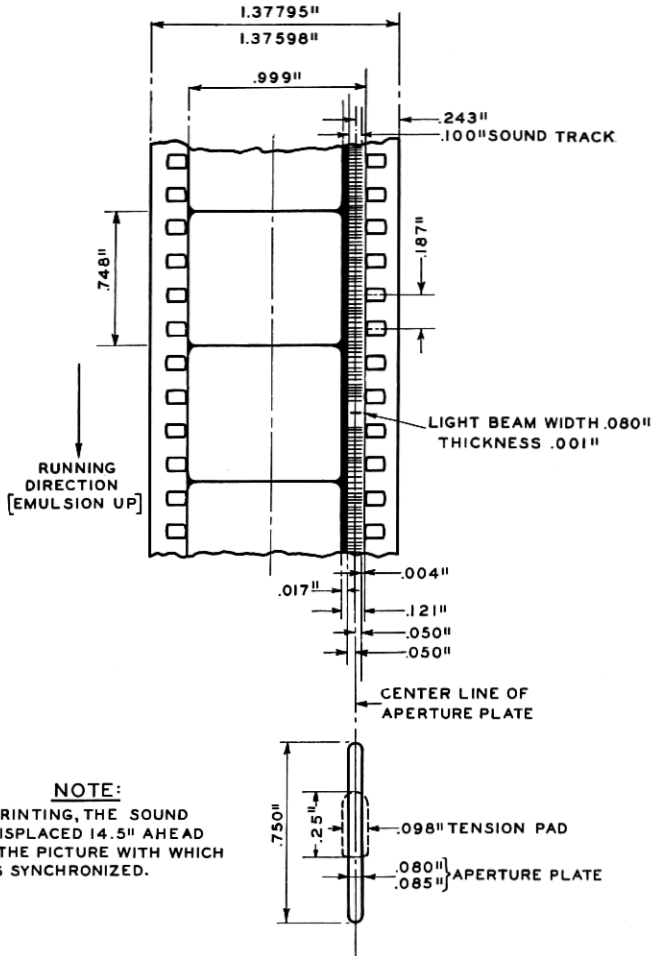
Picture and sound track dimensions of synchronized sound film for standard 35 mm. positive stock.
